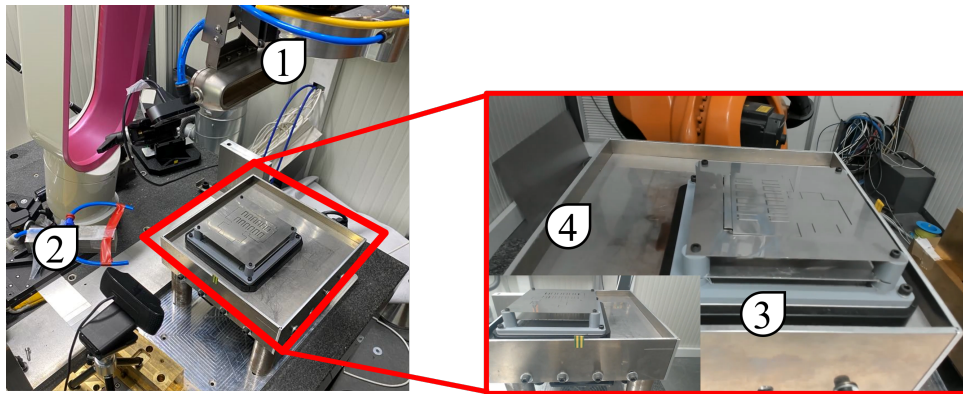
The experimental setup. 1: The laser tool head. 2: Compressed air supply for cooling. 3: Fixture mounted on XPlanar mover. 4: XPlanar tile. Link to video <https://youtu.be/DSIt6erkAvM>
